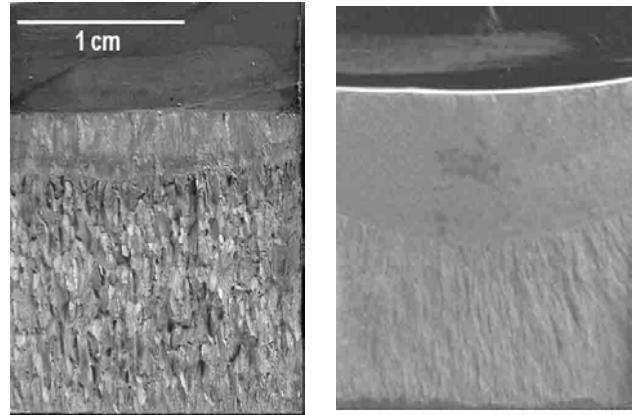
Fracture surfaces of toughness specimens. a) β -forged Ti-6246 b) $\alpha+\beta$ -forged Ti-6246
